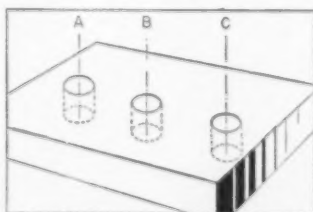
In grinding three holes to size, A and B are roughed to within .001"-.002", and C within about .005". Using a freshly charged mandrel, C is finished to size, thereby breaking down the high points on the tool. A and B may now be safely ground to size.
